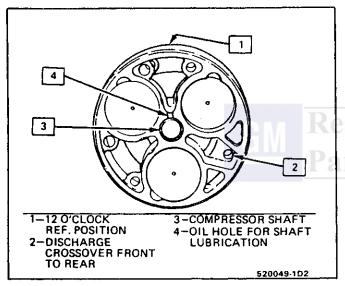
Rear View and Detail of HR-6 Cylinder and Shaft Assembly
